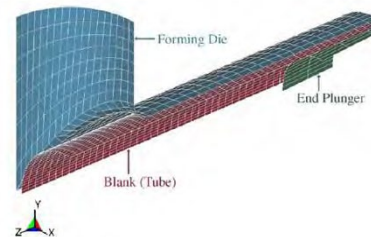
Model FEM of the T-branch of the tube and mold shape [14]
